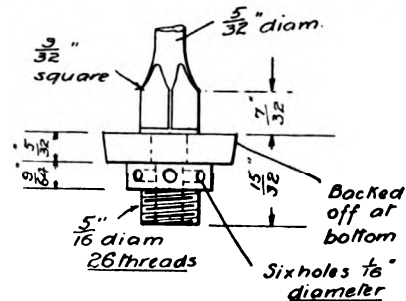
DETAIL OF PLUG WHICH FORMS ANNULAR ORIFICE.
